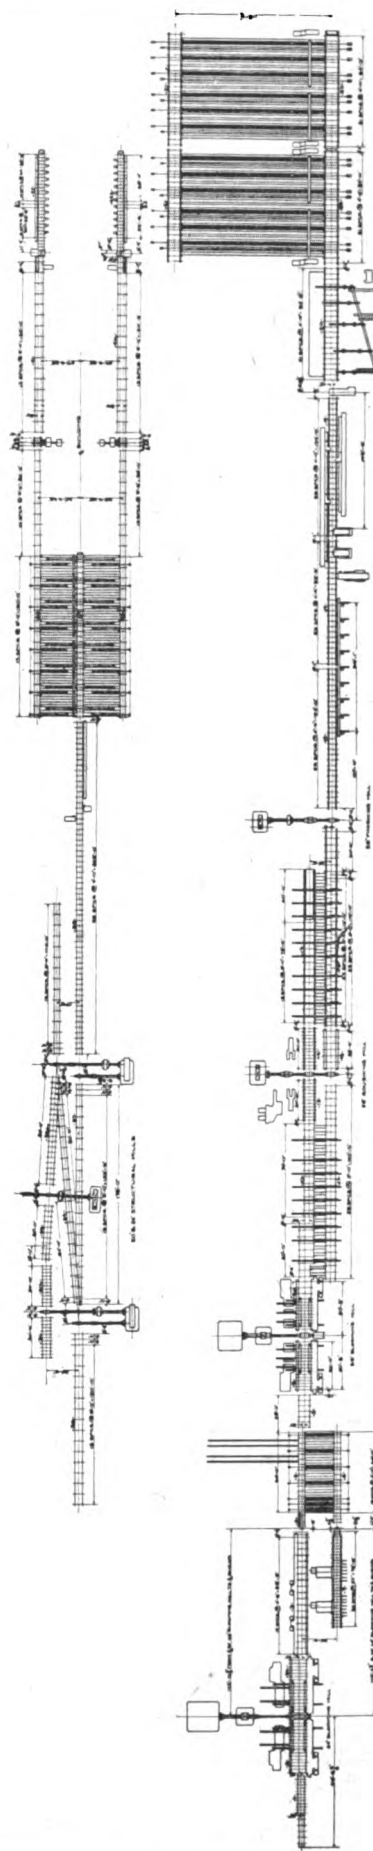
General arrangement of the 44 in. and 36 in. blooming mills and 28 in., 20 in. and 24 in. structural mills for Micheville.
